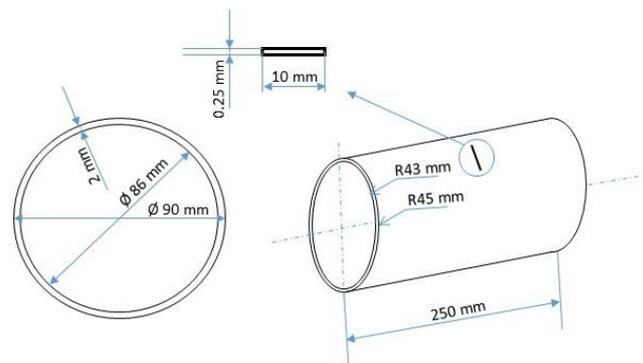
Dimensions of damaged Al 6063 aluminum pipe.
